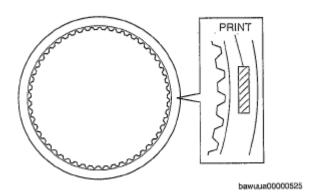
Inspecting Lining Of All Drive Plates Courtesy of MAZDA MOTORS CORP.
